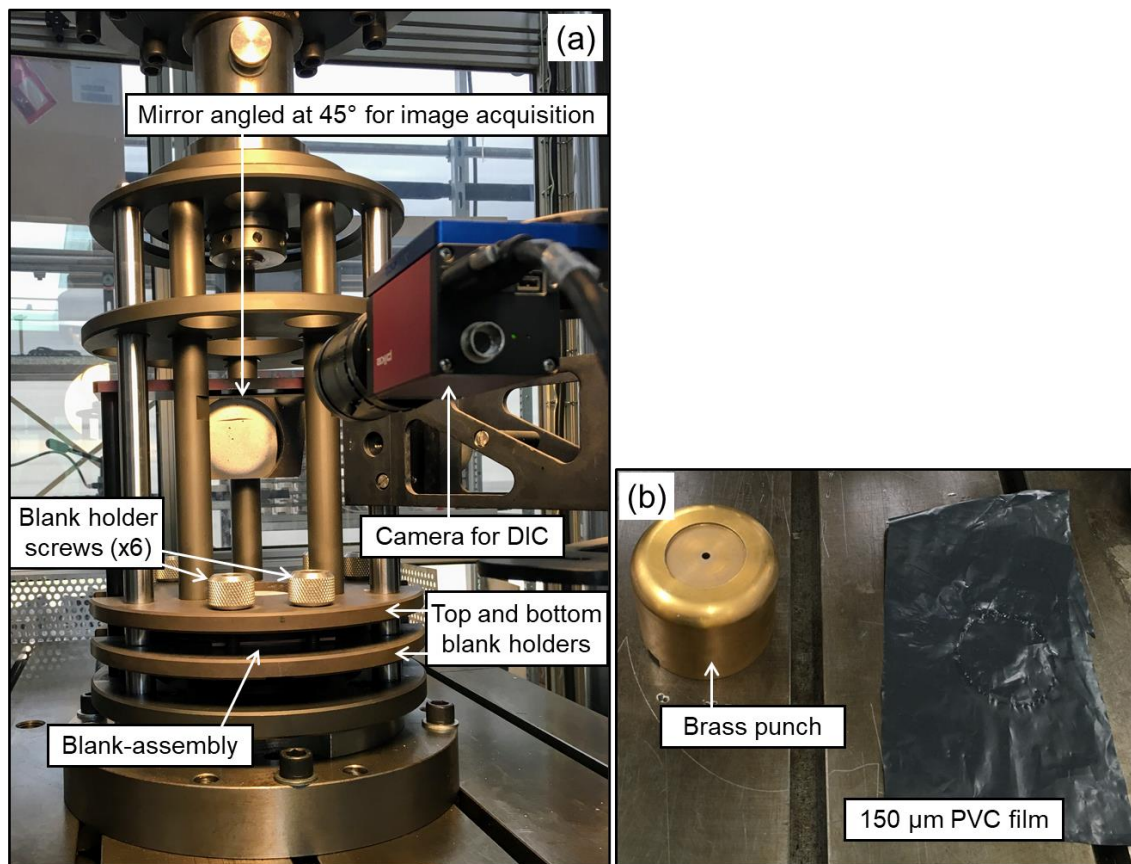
Pictures with (a) the main components of the setup for the Marciniak tests and (b) the punch and PVC films that are below the blank-assembly.
